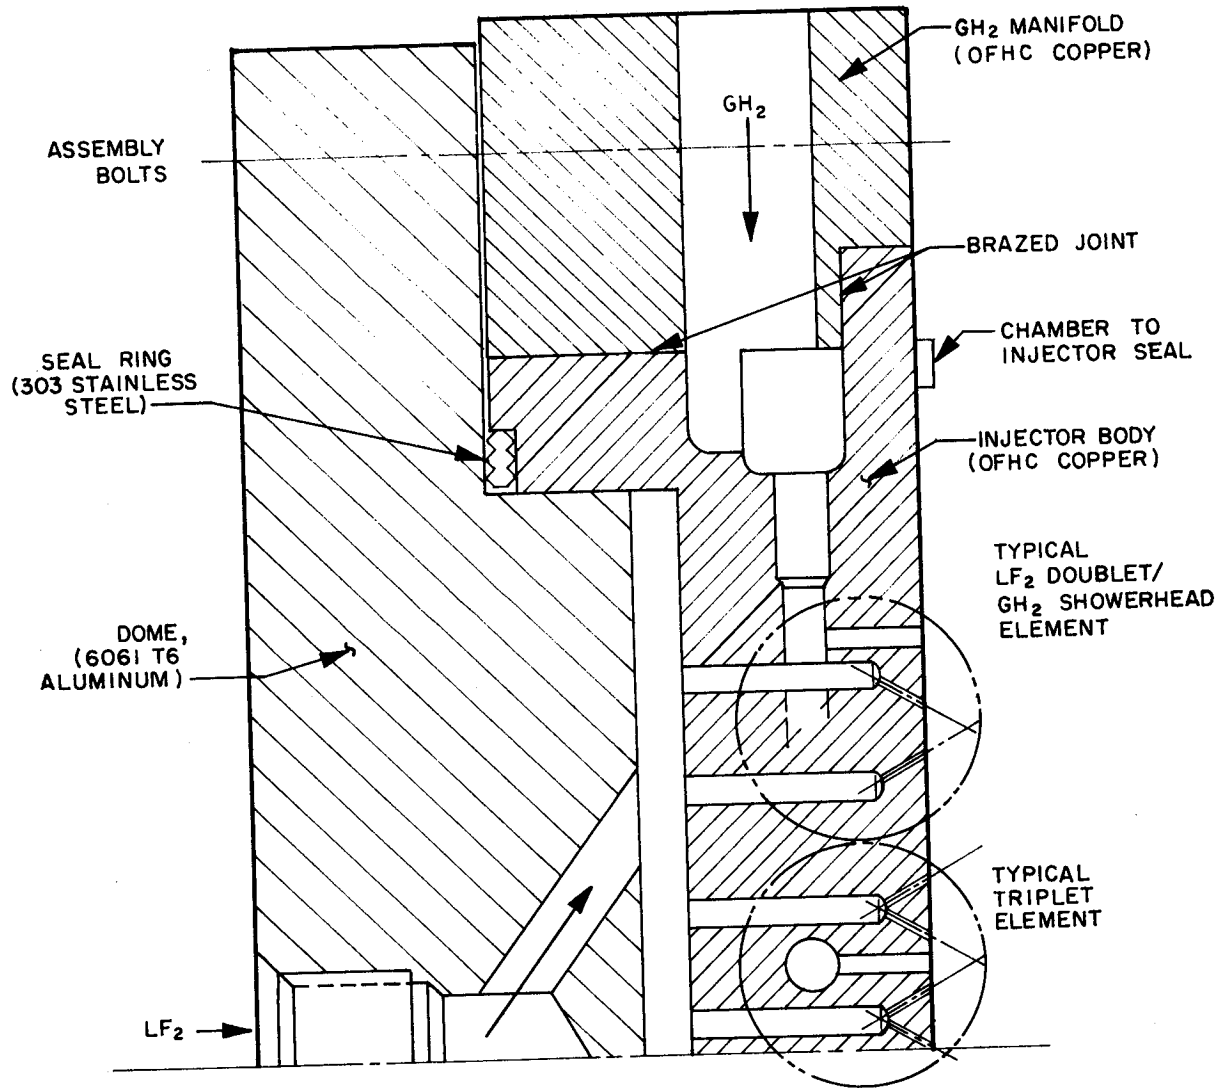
Method of Assembly of Injector, Fuel Manifold, and Oxidizer Dome, Showing Typical Orifice Feed Arrangements Used for the Triplet and Doublet/Showerhead Injector Patterns.
